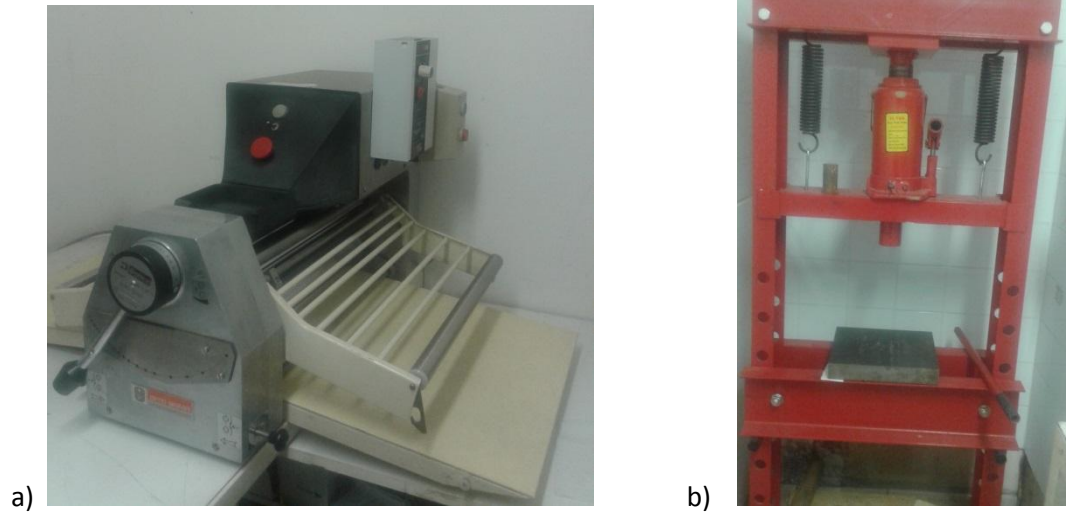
Photographs of shaping equipments: a) roll-pressing (DITO SAMA) and b) hydraulic press used for vertical extrusion
